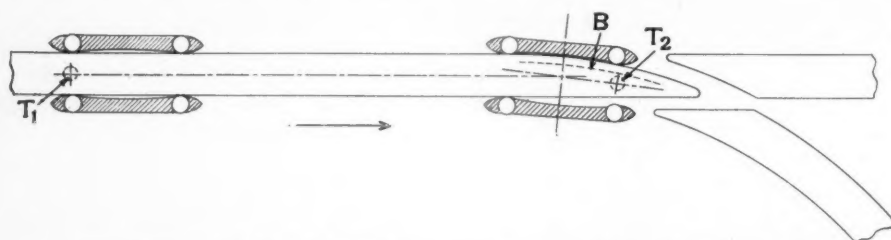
Section Through Truck Side Frames at the Lower Flange of the Track I-Beam, Showing a Right-Hand Switch
